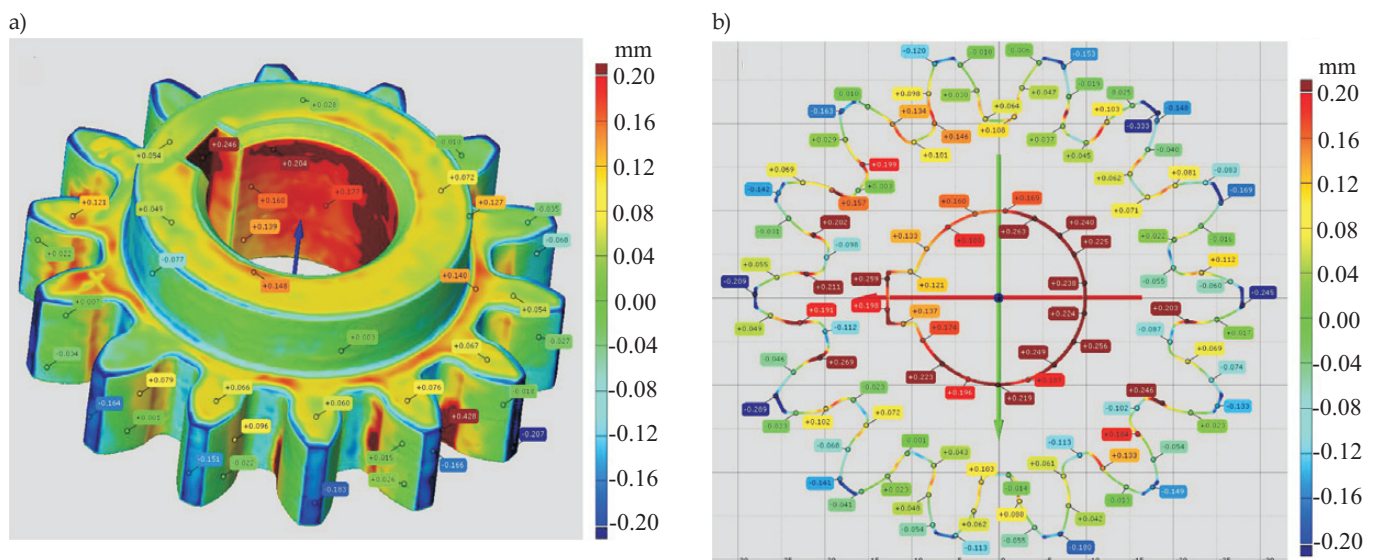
Dimensional deviations of: a) gear made from Precimid 1170 material, b) the profile of gear
